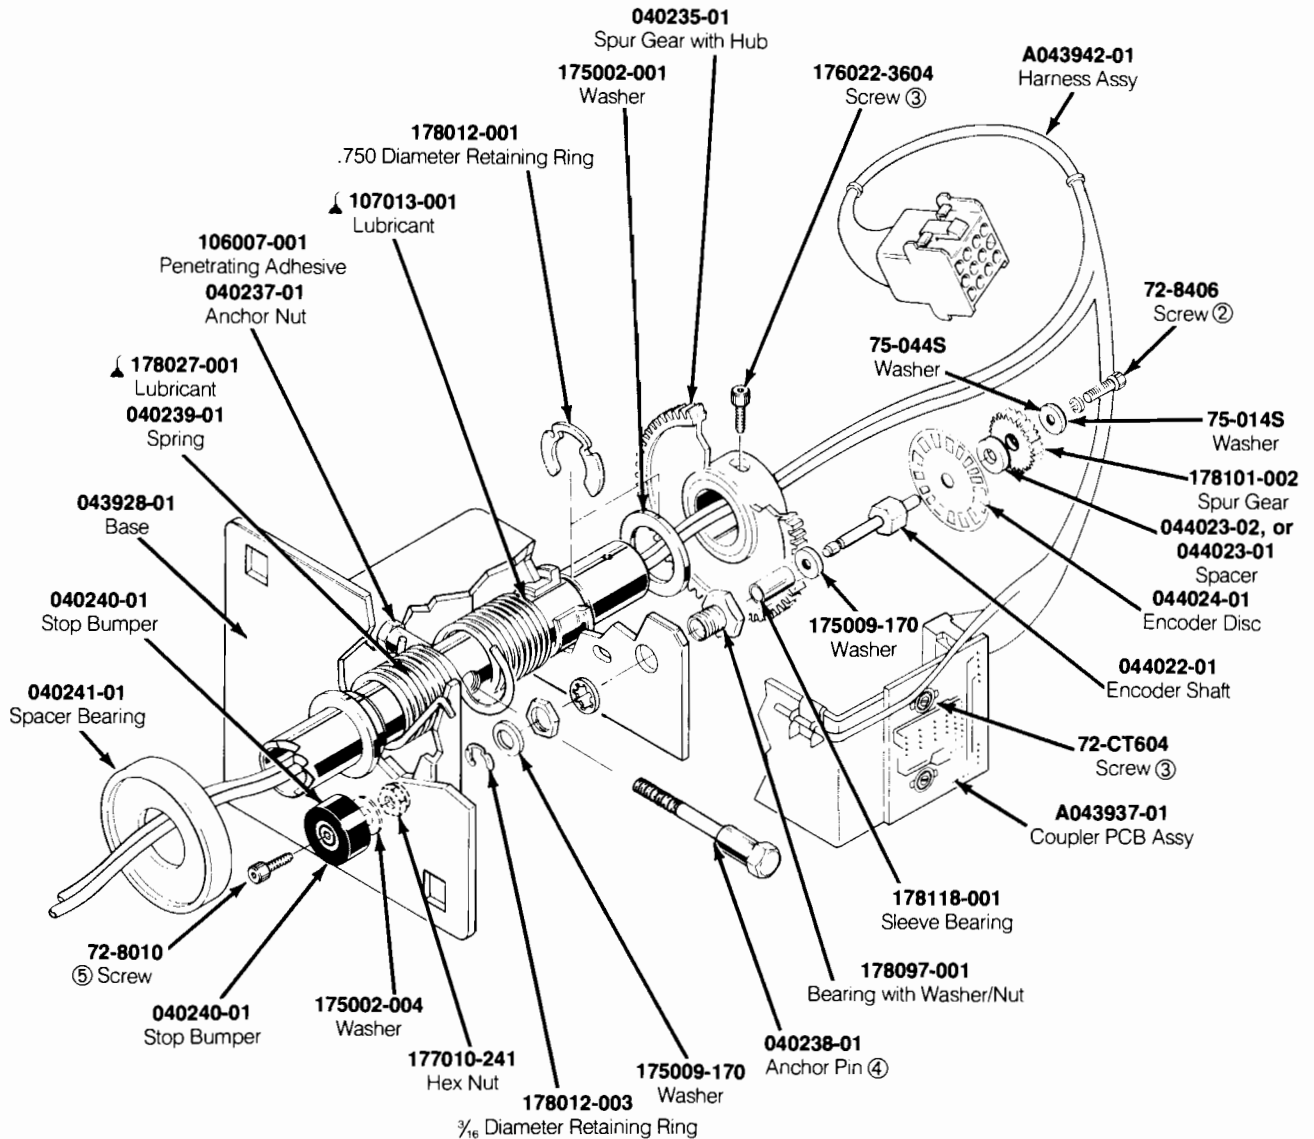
RTC Steering Control Disassembly and Lubrication, Continued
